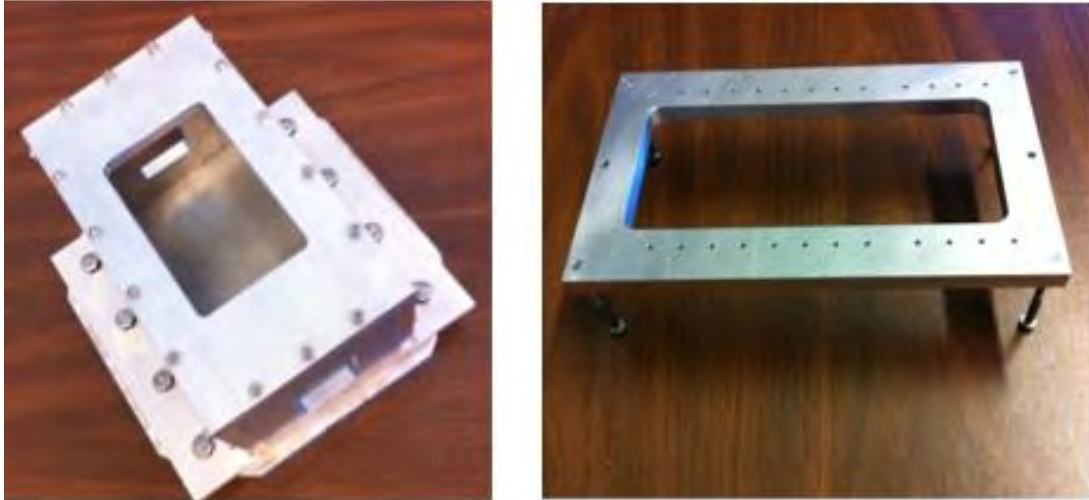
(Left) 1.6 Unit Test Structure, (Right) TVAC C2B Payload Test Stand designed and manufactured at NPS.
